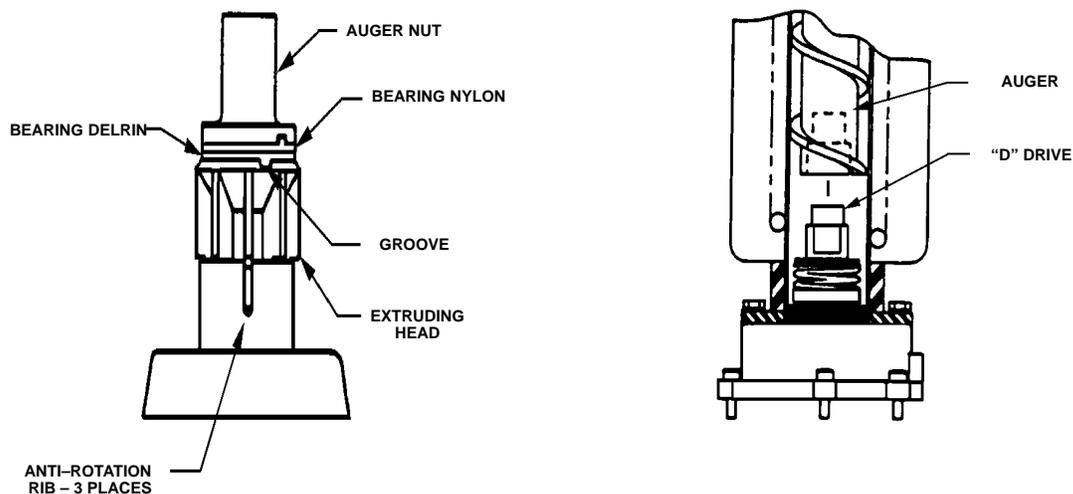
AUGER AND EXTRUDING HEAD REMOVAL
